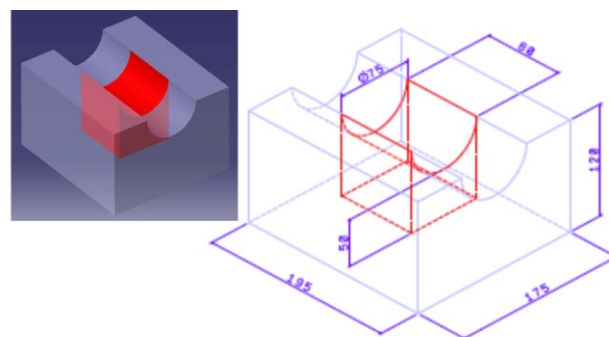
The test casting with marked sampling site for metallographic examinations; dimensions of the casting 195×175×120 mm; dimensions of the sample: 80×50×50 mm [10, 18]
